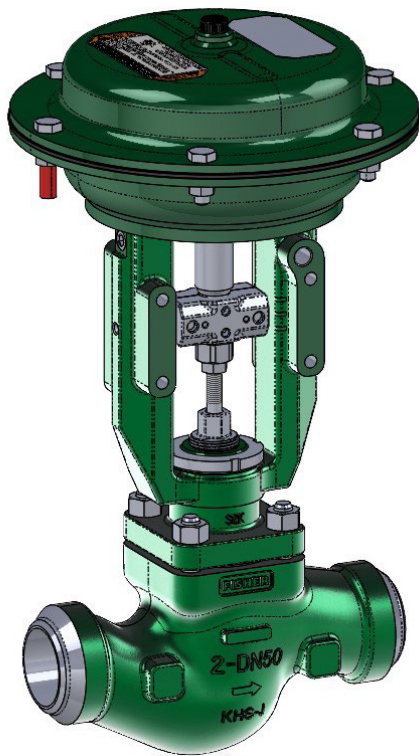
Fisher GX Bolted Bonnet Control Valve Assembly with Port-Guided Contoured Plug (Port Sizes 36 to 136 mm)
